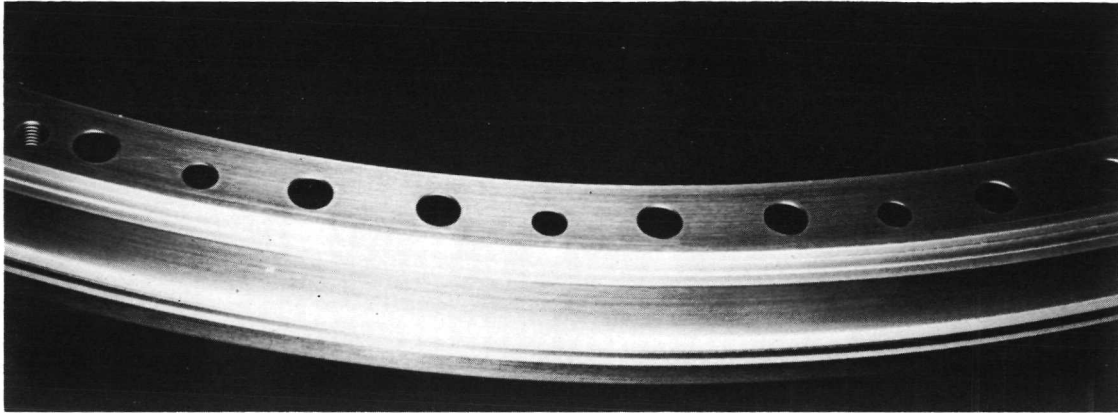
OD of Labyrinth Seal Ring Showing Knife Edge Seals
